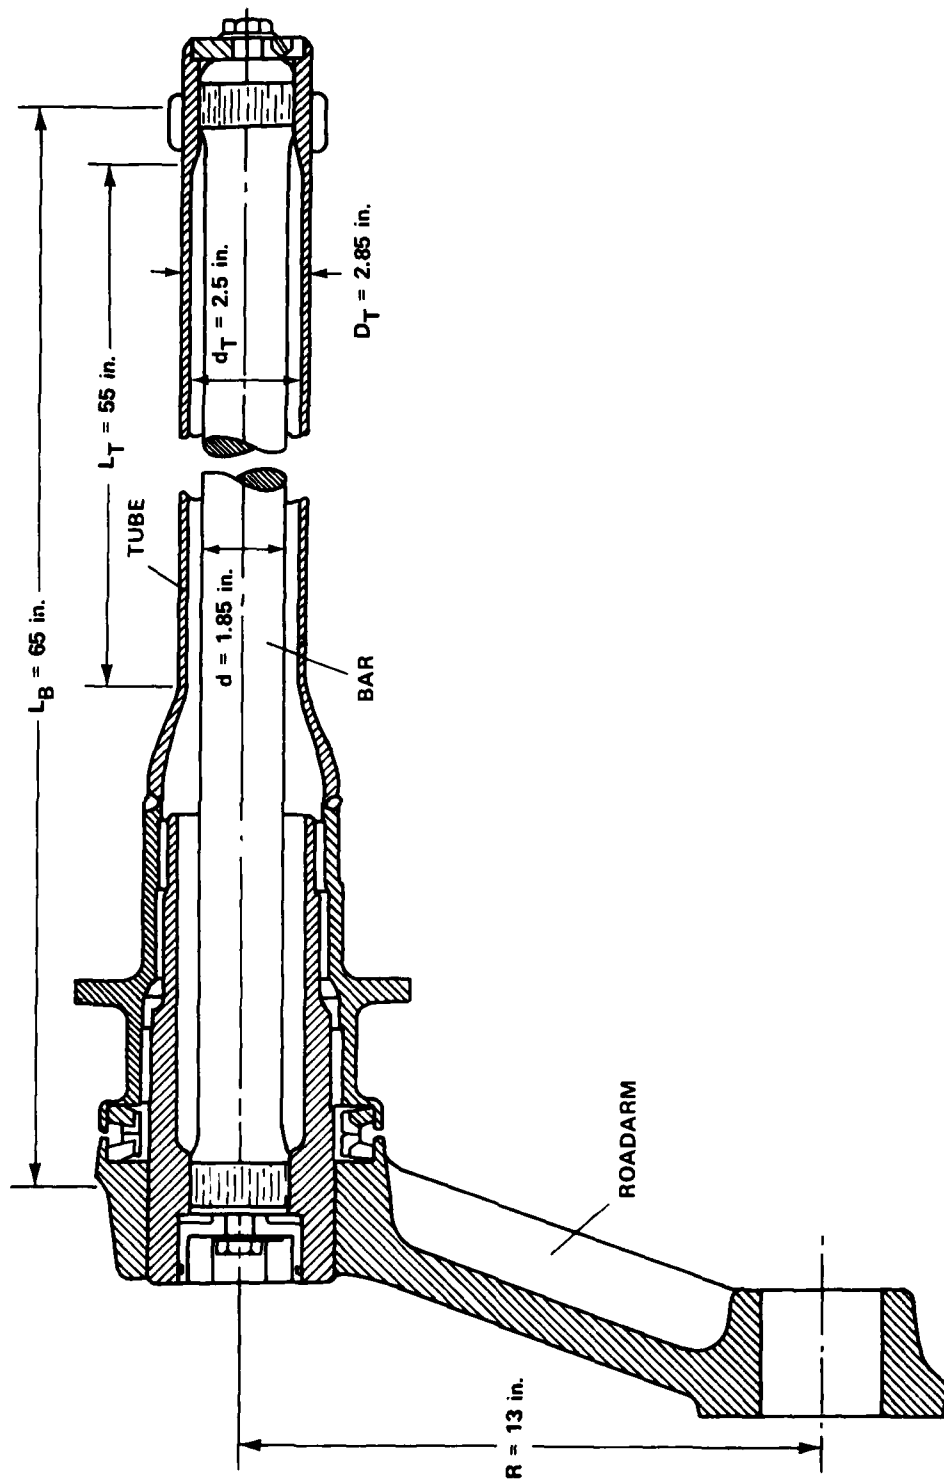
Existing Tube-Over-Bar Suspension Assembly
